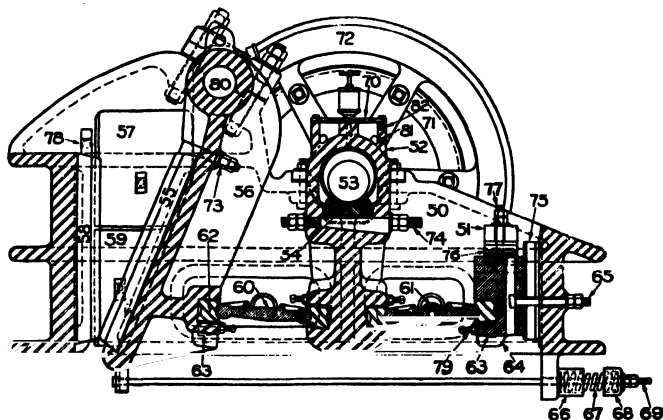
Principal parts of a Buchanan type "B" jaw-crusher.
